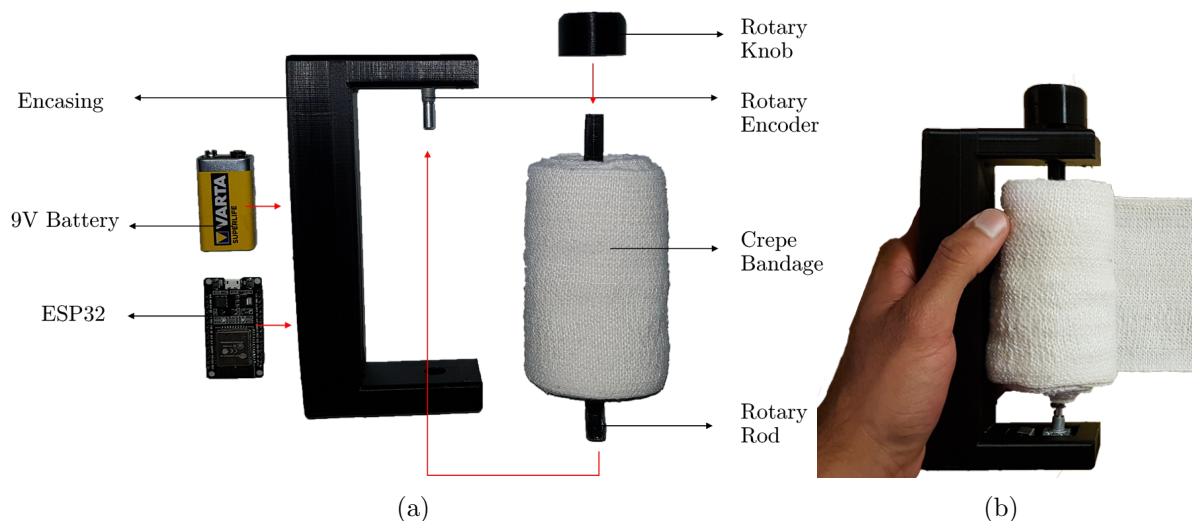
(a) BUD Assembly, (b) Assembled dispenser
